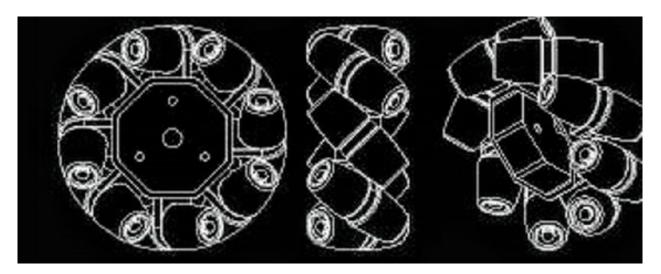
Mecanum wheel with centrally mounted rollers.
